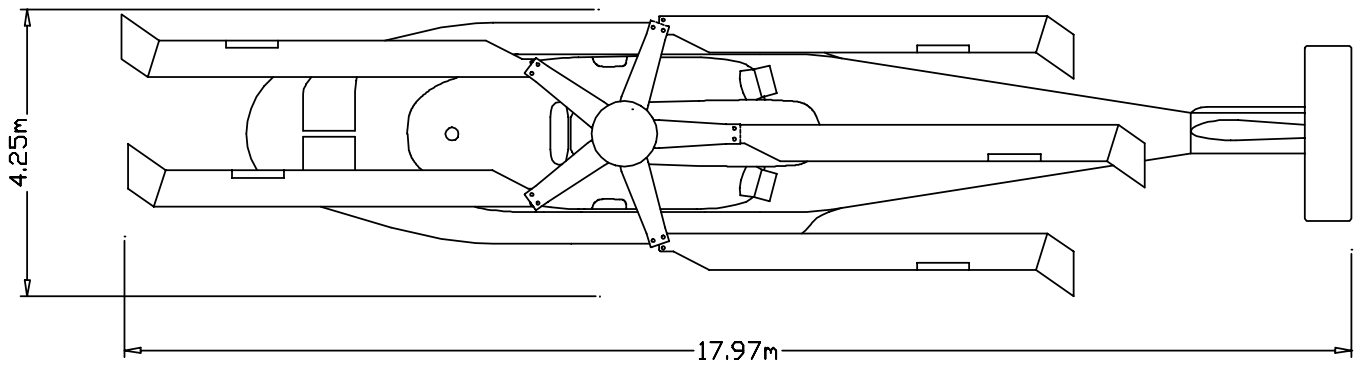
Top view of helicopter with blades folded (support frame not shown)
